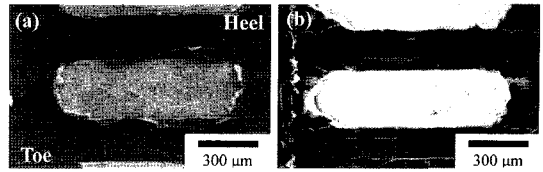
The fracture surface of solder joint (SnBi plating on Cu LF). (a) After 500 cycles (b) After 1000 cycles.
